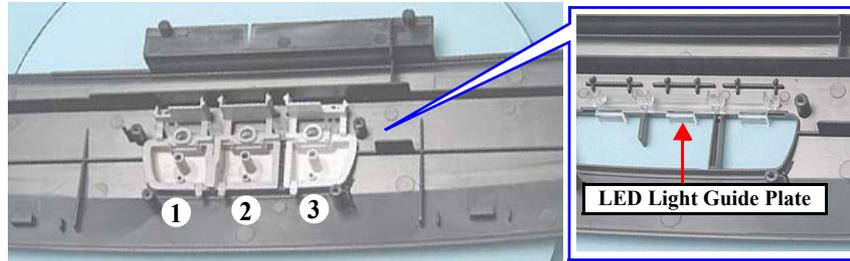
Removing the SW Buttons (R260/R265/R270)
